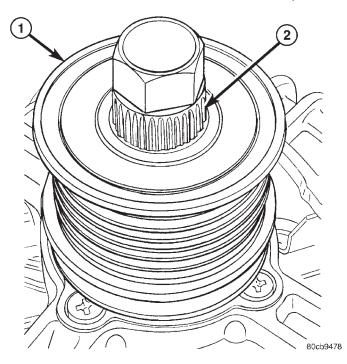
#8823 (VM.1048) TOOL AND INA DECOUPLER
